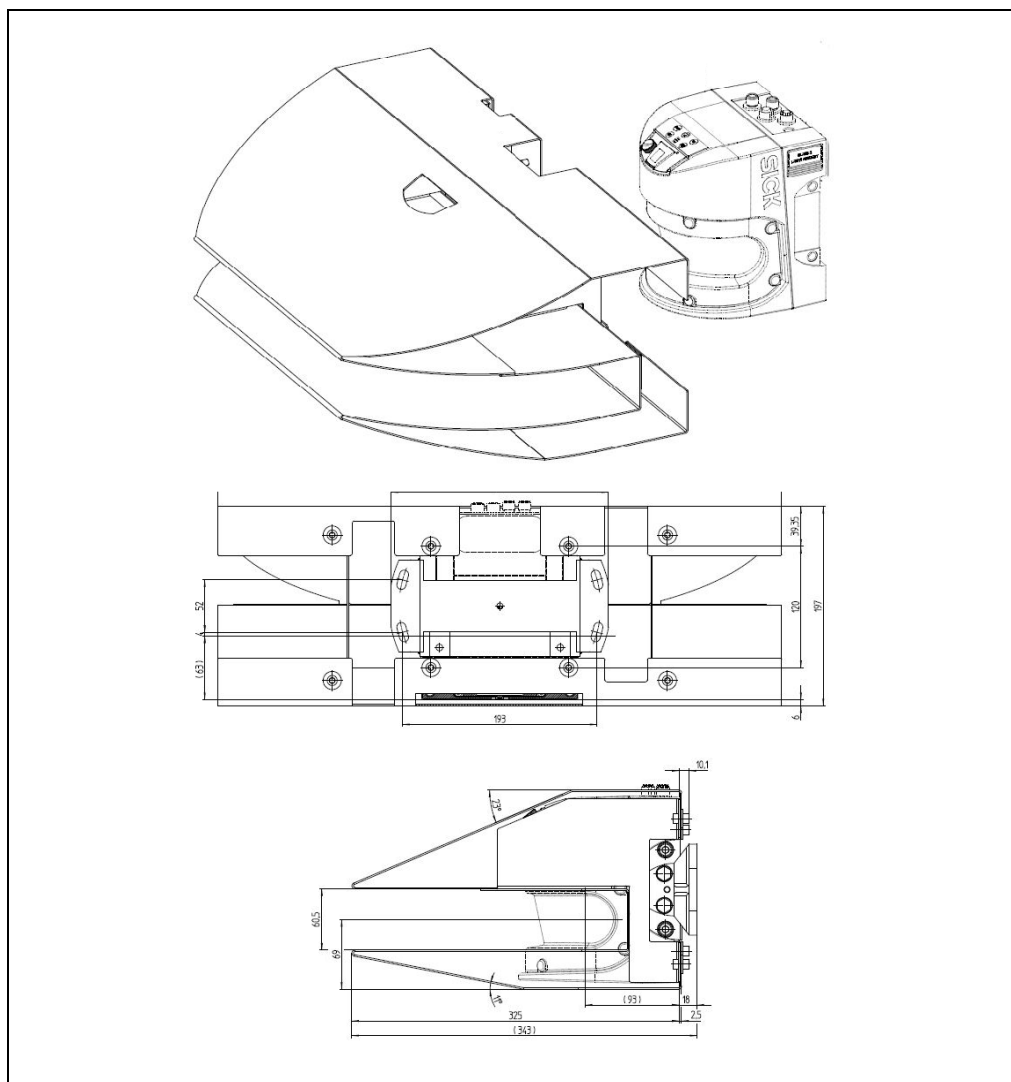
Dimensional drawings for the LMS511 SE with weather hood (large)
